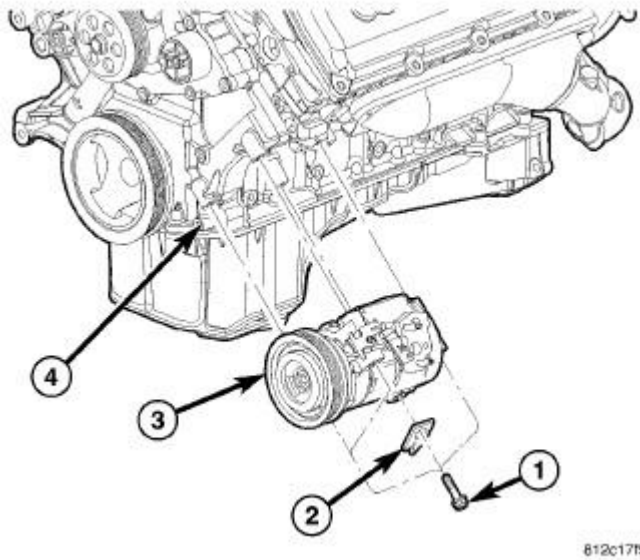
Removing/Installing A/C Compressor - 5.7L
